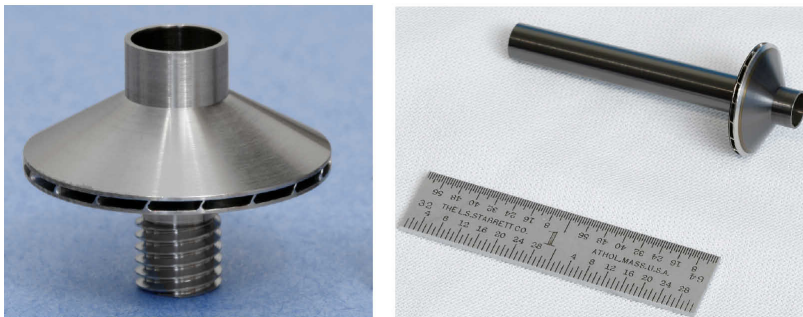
Finish machined advanced geometry impeller (left) and final rotor assembly (right).
